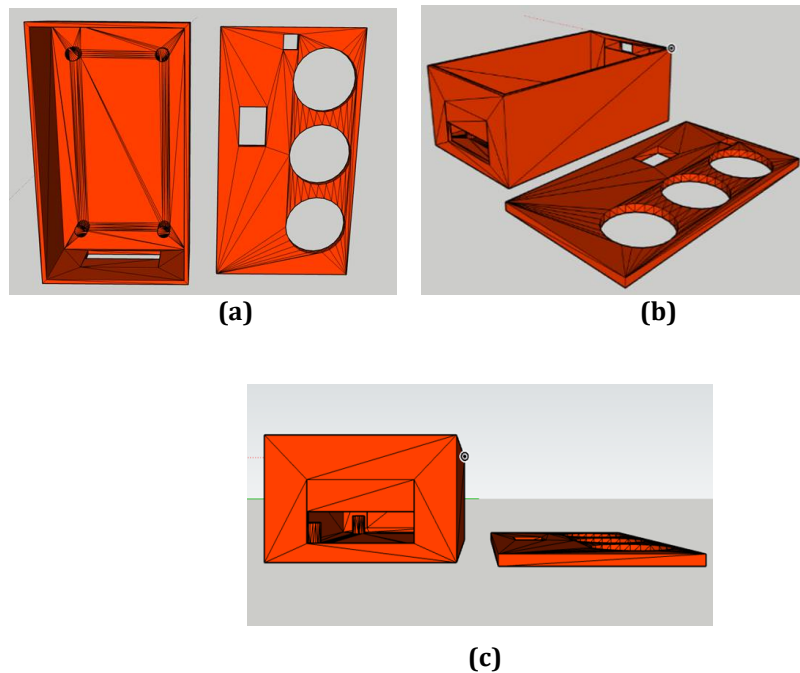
Design Casing; (a) Top View (b) Side View; (c) Bottom View
